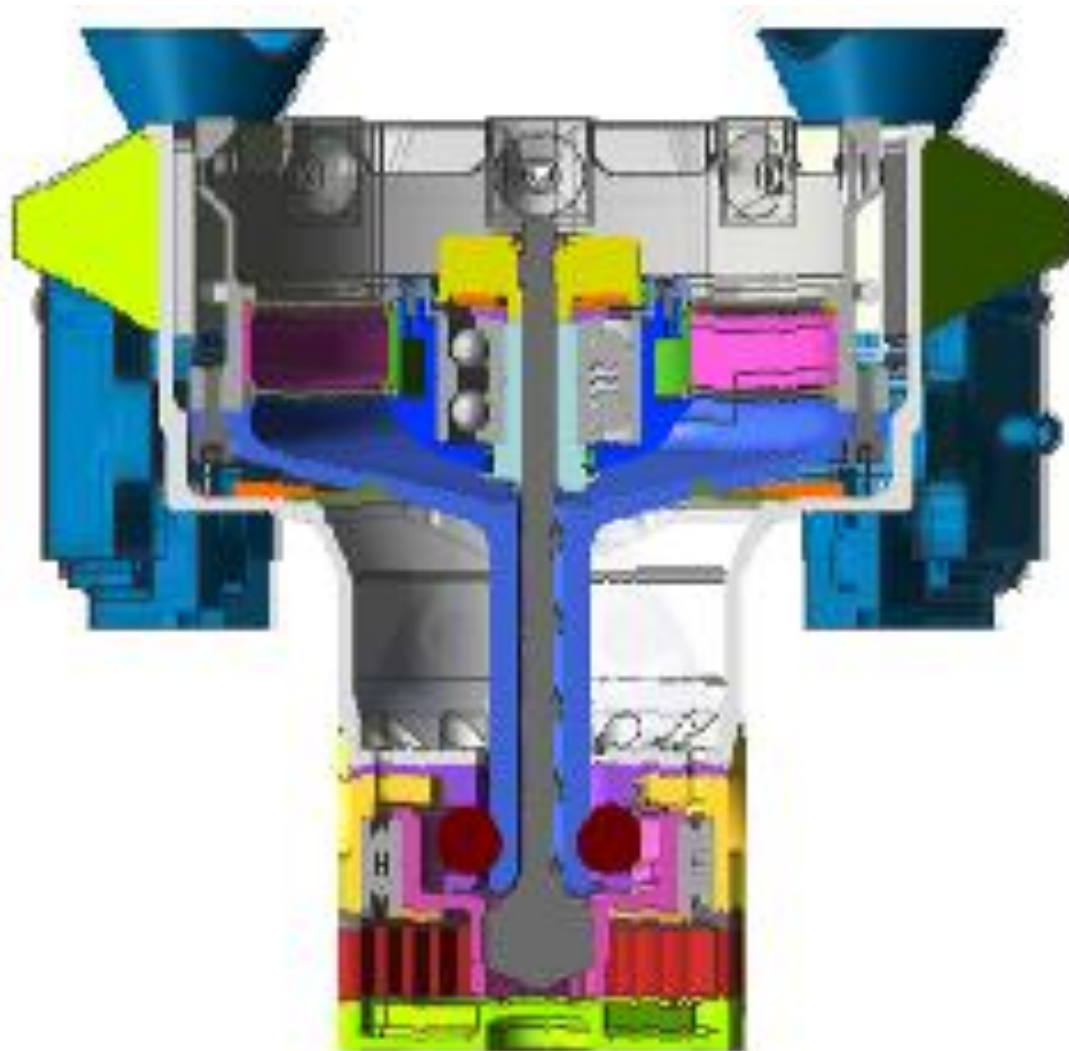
Receiver Assembly with Drill Bit Assembly, Section View
